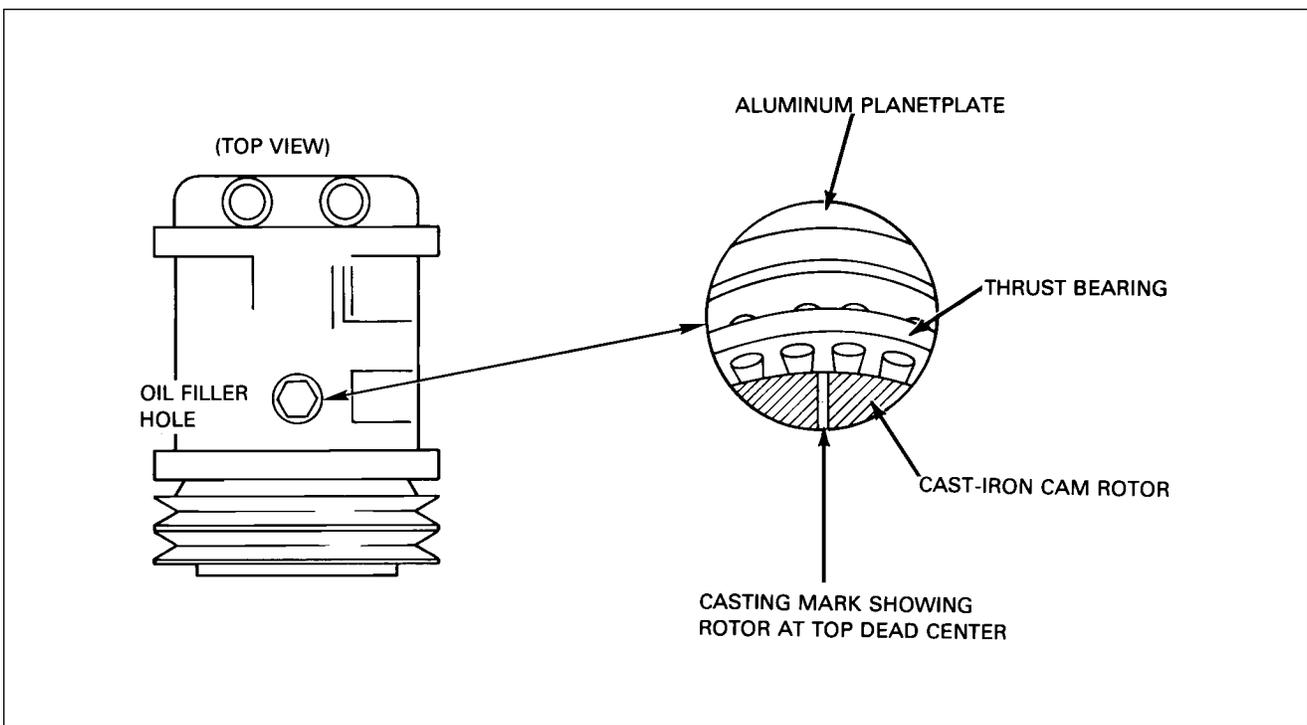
Top Dead Center Casting Mark (Sankyo Compressor)
